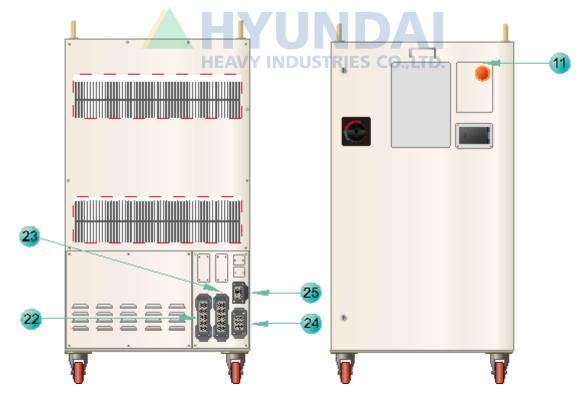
Hi5-N00 Part arrangement parts in the exterior of a controller
